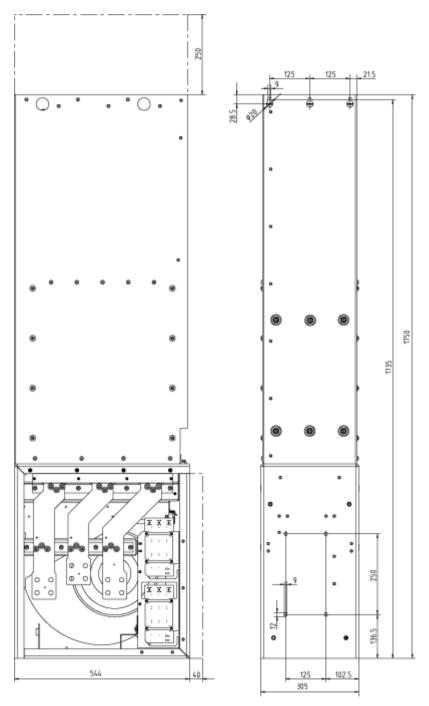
Dimension drawing for Active Interface Module, frame size HI Side view, rear view
